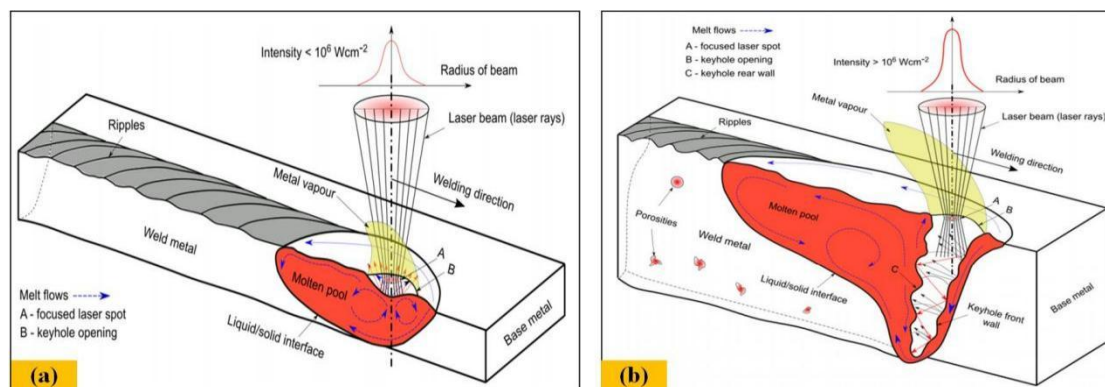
Schematic drawing of laser beam physics in laser beam welding in case of (a) conduction welding and (b) keyhole welding modes [24].
